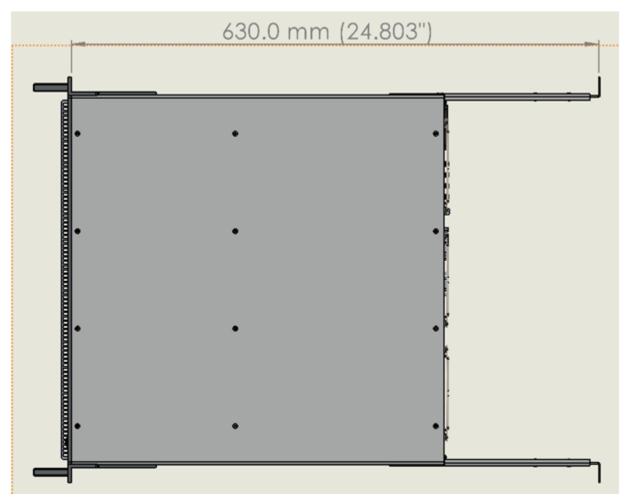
PXE21100 with Rear Rack Mounting Extenders
